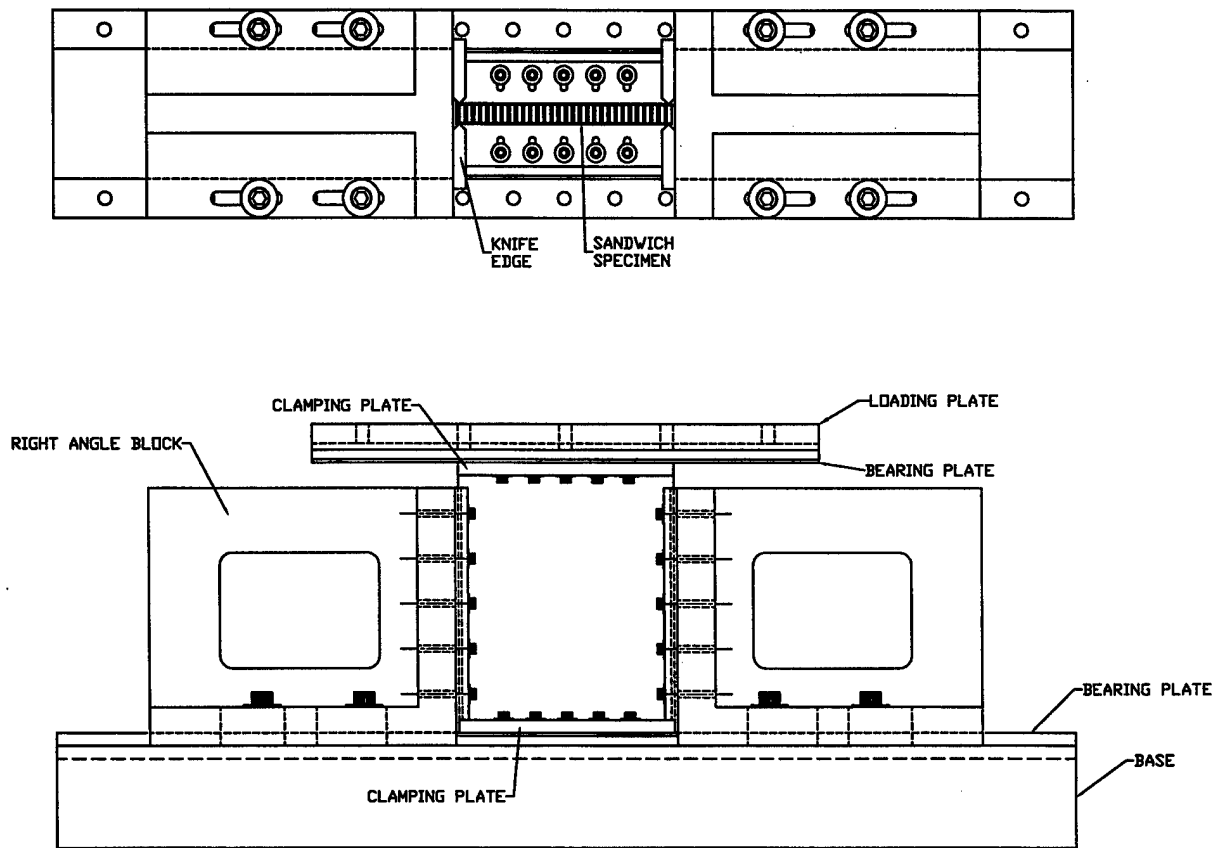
TOP AND FRONT VIEW OF THE CAI FIXTURE
